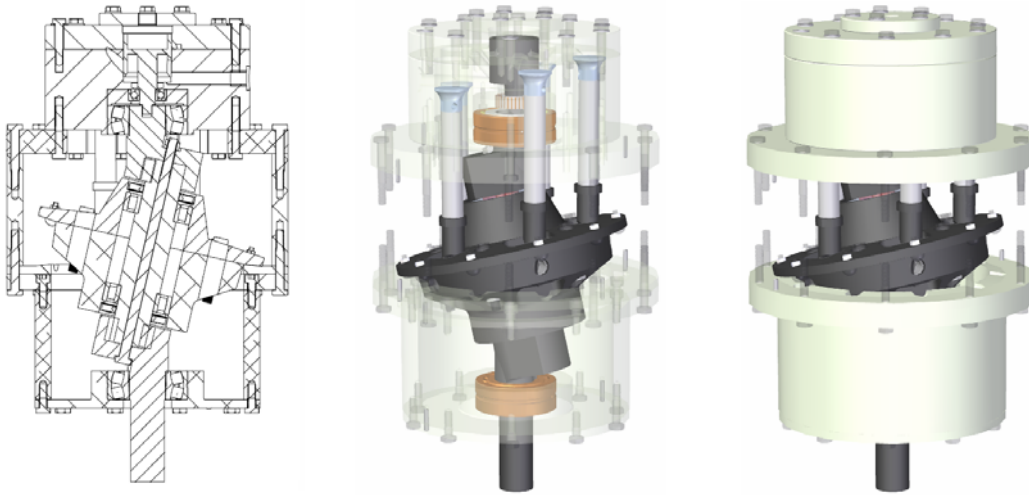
CAD drawing and 3D renderings of the physical demonstrator of the axial piston type steam expander constructed in [16].
